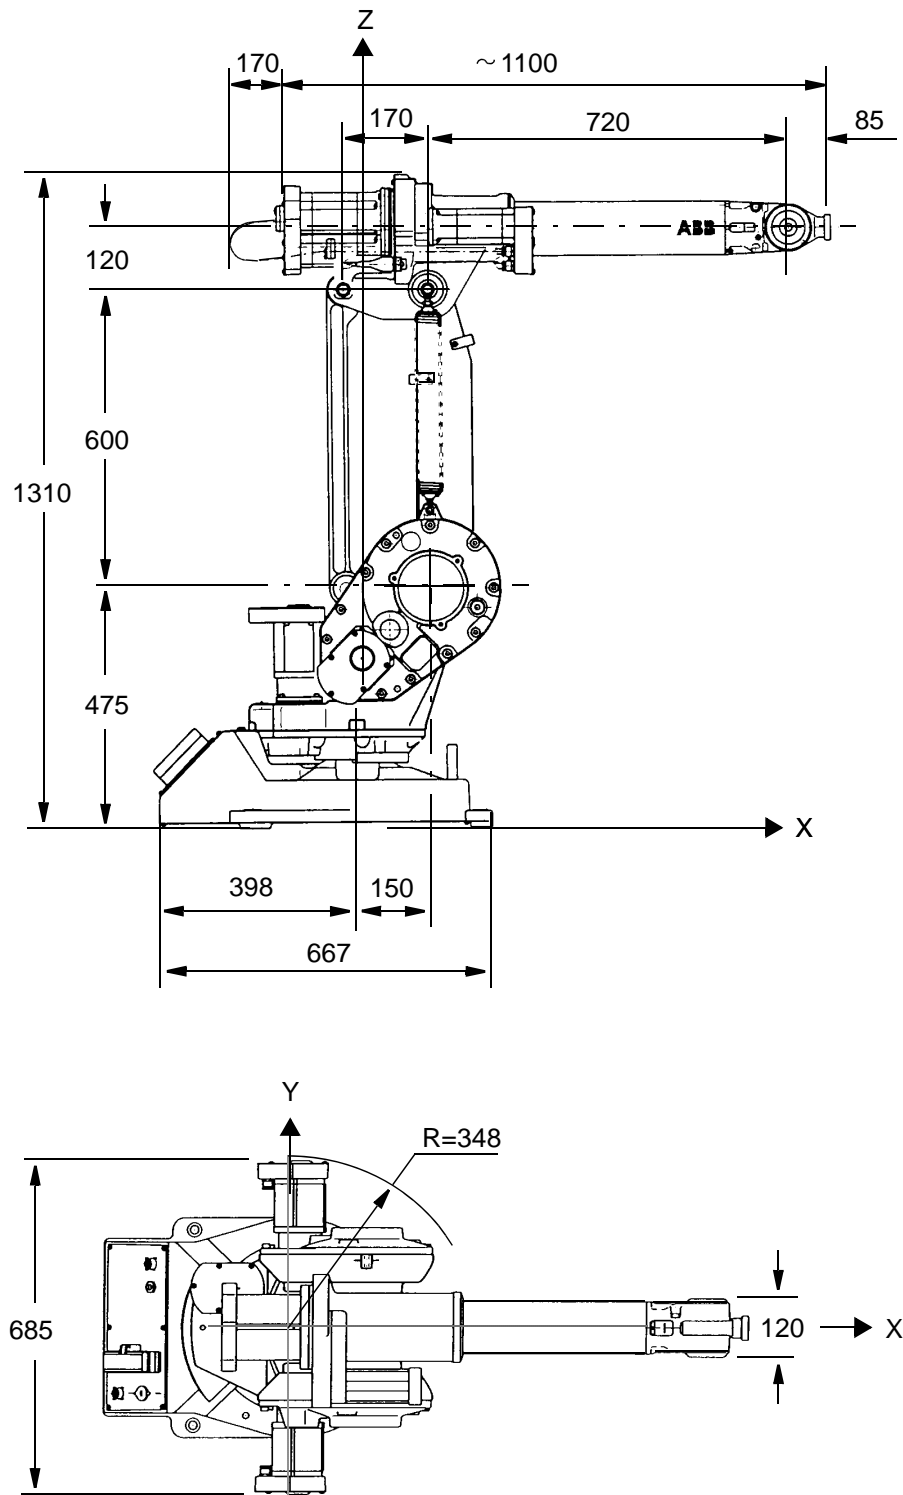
View of the manipulator (floor mounted version) from the side and above(dimensions in mm).
